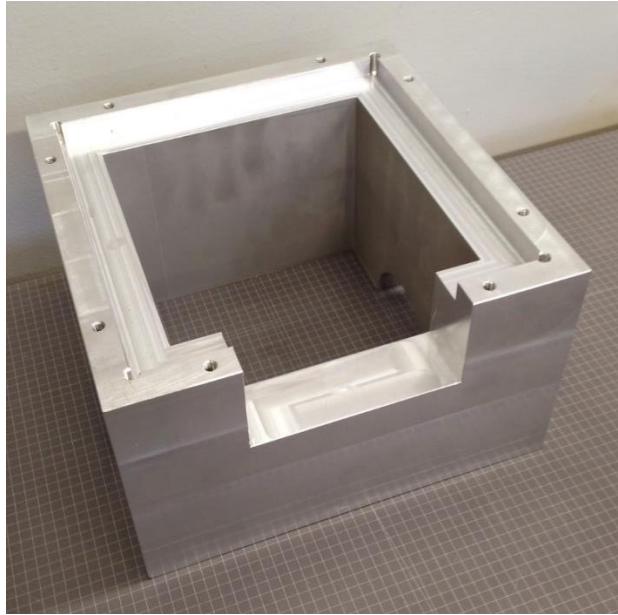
Specimen holder without the cover to show the internal lip that the flat panel composite rests on.
